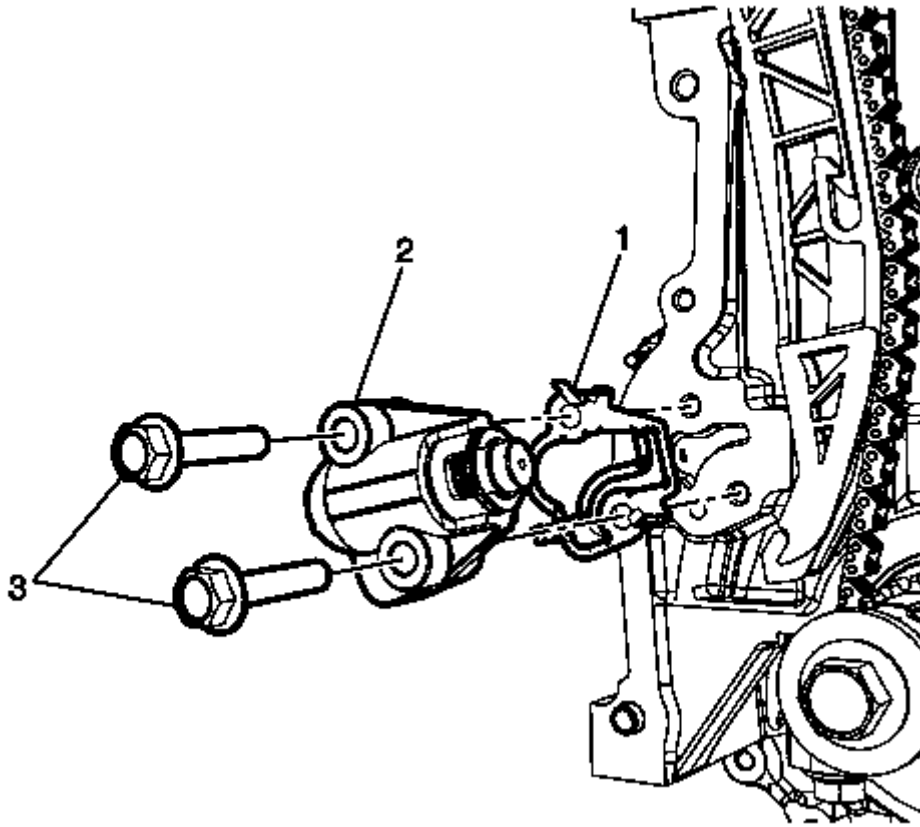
Timing Chain Tensioner Bolts And Tensioner
